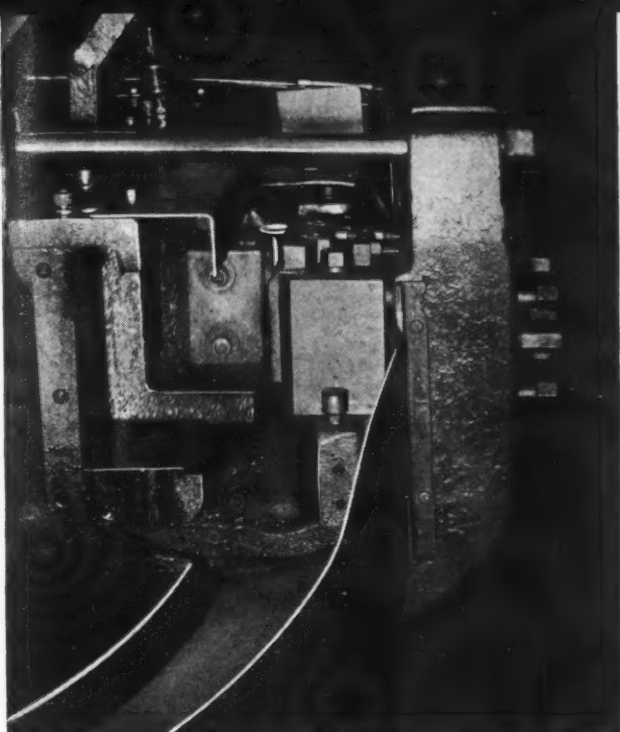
Modified Thread-rolling Machine in which the Stem of the Hot Extruded and Coined Valve is Straightened
